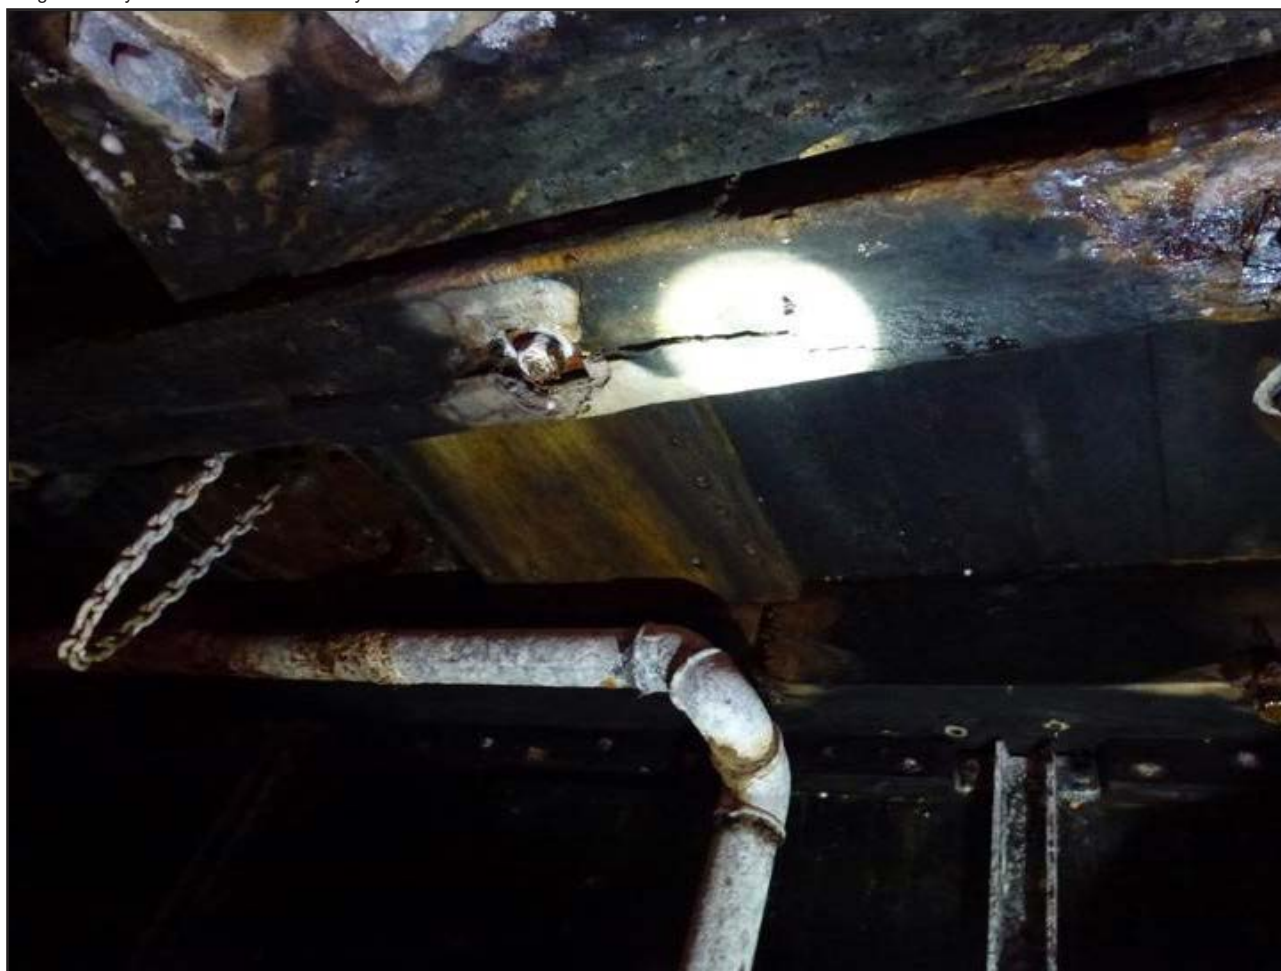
Karen* – crack in fish hold transverse beam used to support the hydraulic winch bedplate
